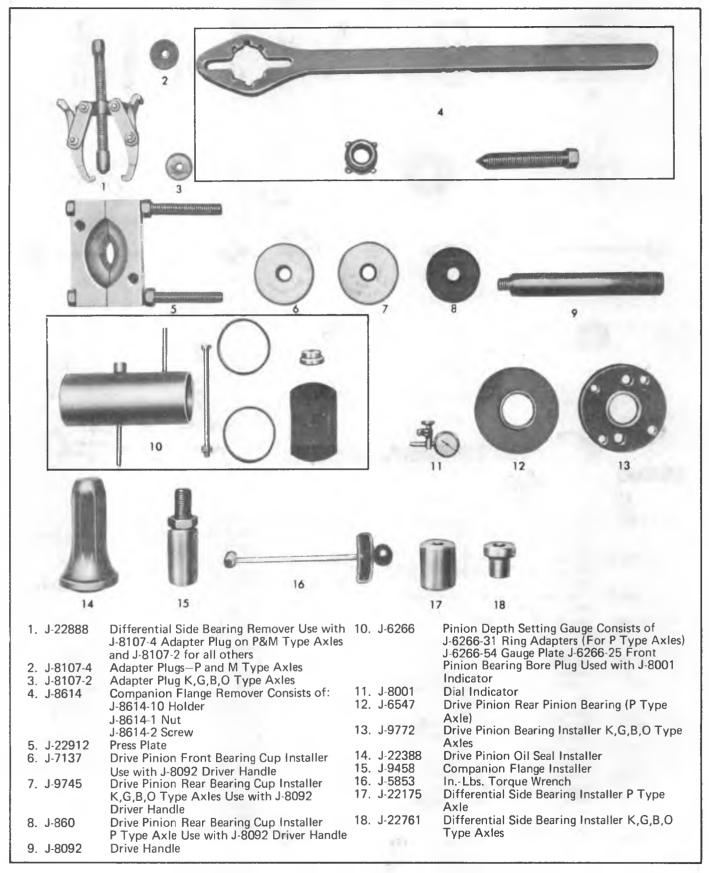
T-Special Tools-Chevrolet, Nova, Camaro and 125" W.B. Station Wagon
